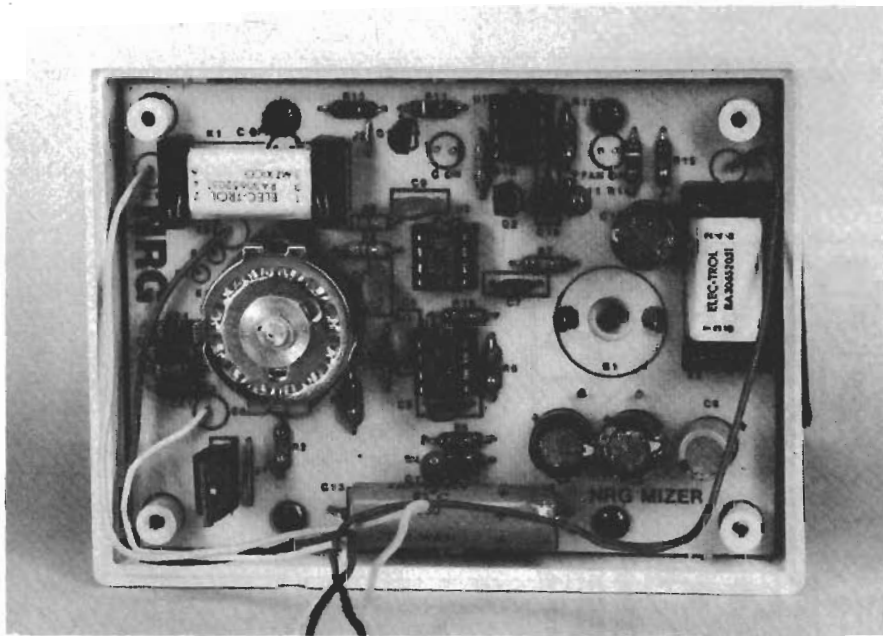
COMPONENT SIDE. Although the unit is small (about 3×4 inches), the components aren't densely packed.
